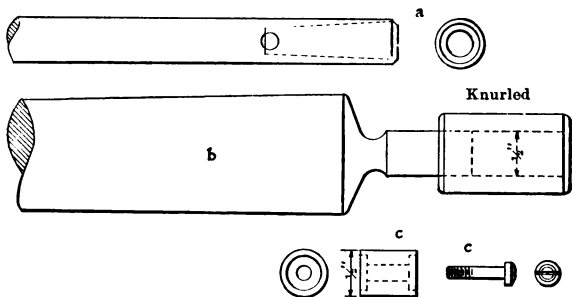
Staff for Indicator, Arbor and Bushing, Button and Screw.
